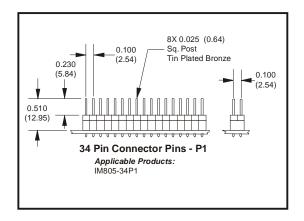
IM805-34P1 Connector P1 Mechanical Drawing
